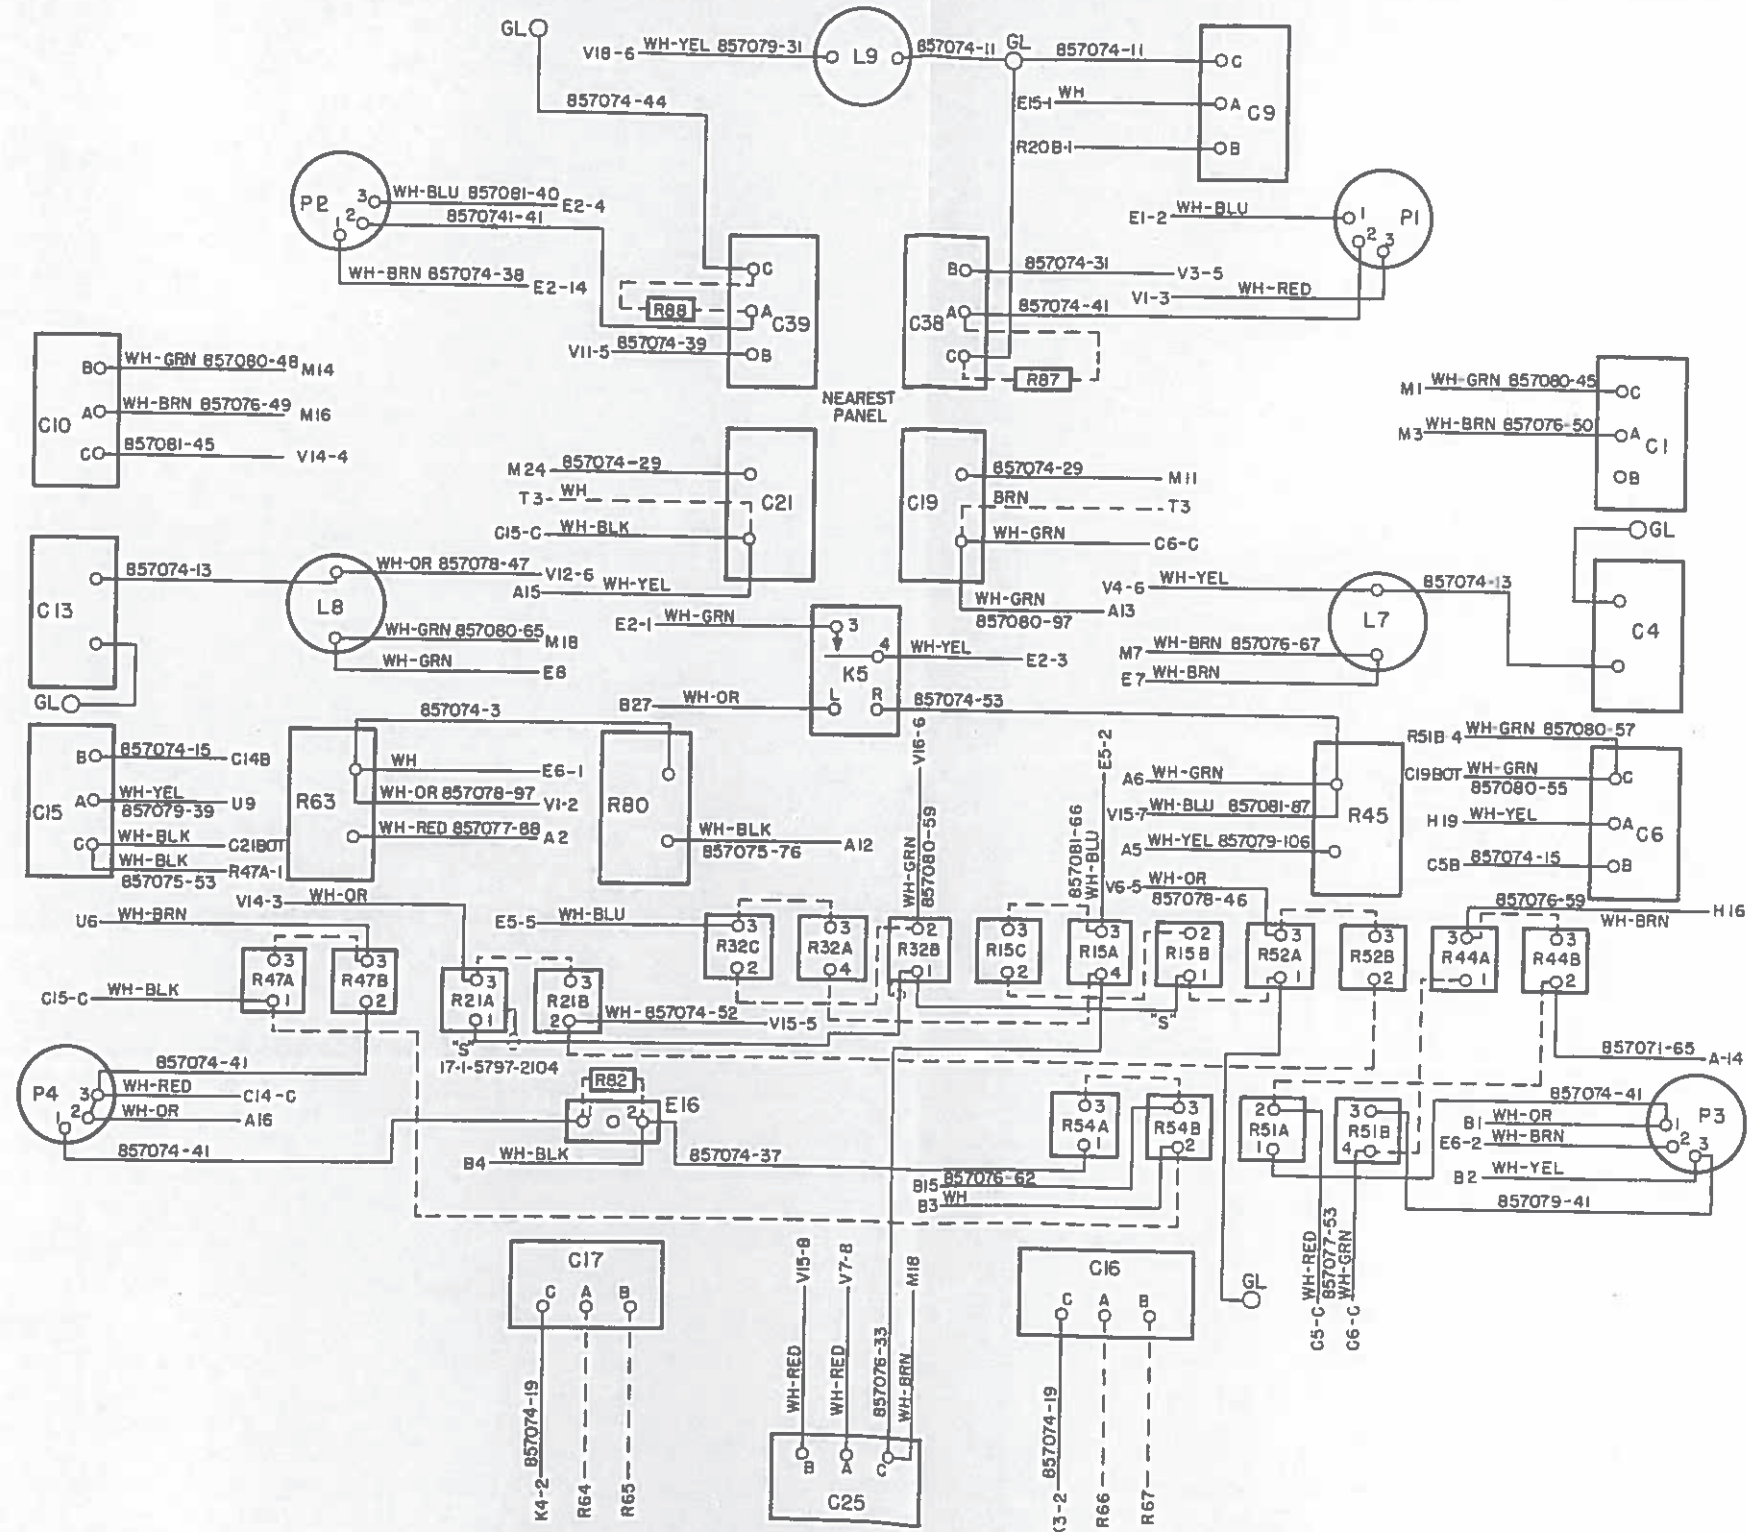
Control Panel Assembled Wiring Diagram (Sheet 4).
